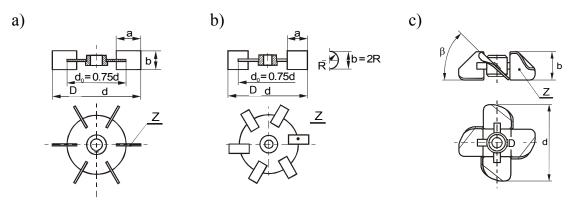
Geometrical parameters of the impellers: a) Rushton turbine (RT), b) Smith turbine (CD 6), c) A 315
